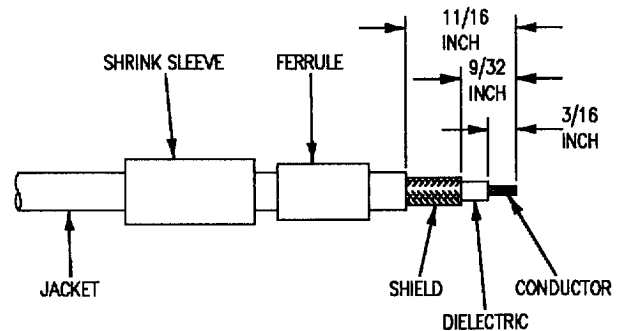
M39012/30-0503 Coaxial Connector Repair (Sheet 2)
